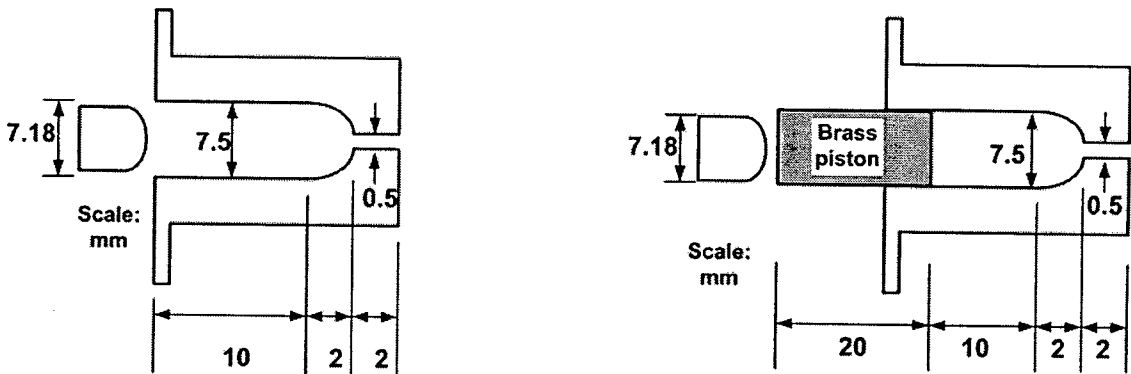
Generation method (a) direct impact and (b) momentum exchange
